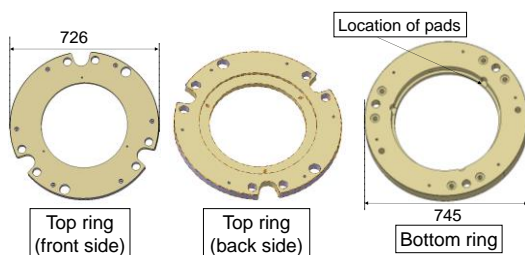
Top and bottom rings from the Floating Ring sub-assembly of M2. (Dimensions in millimetres).
